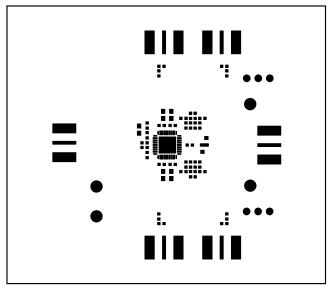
MAX2023 EV Kit PCB Layout—Top Soldermask
